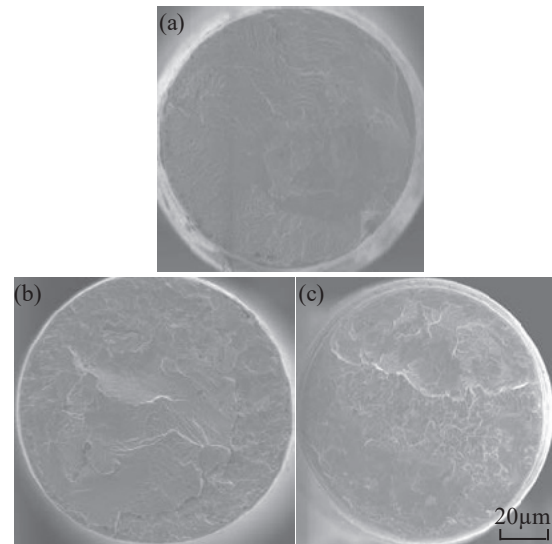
SEM photographs showing fracture surfaces of the directing welded for: (a) J1, (b) J4 and (c) J6.
